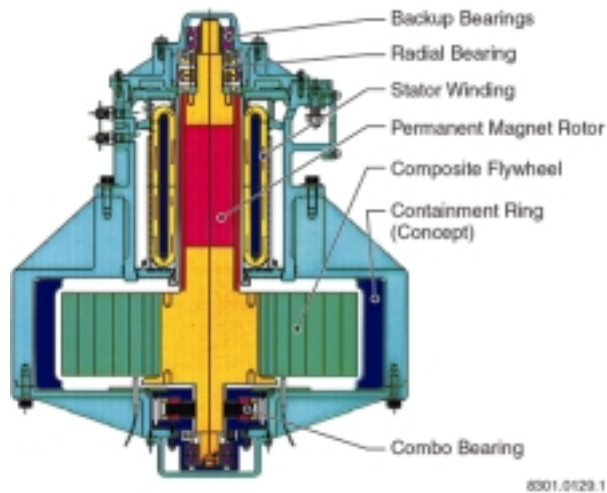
Flywheel System with Combination (Combo) Bearing
